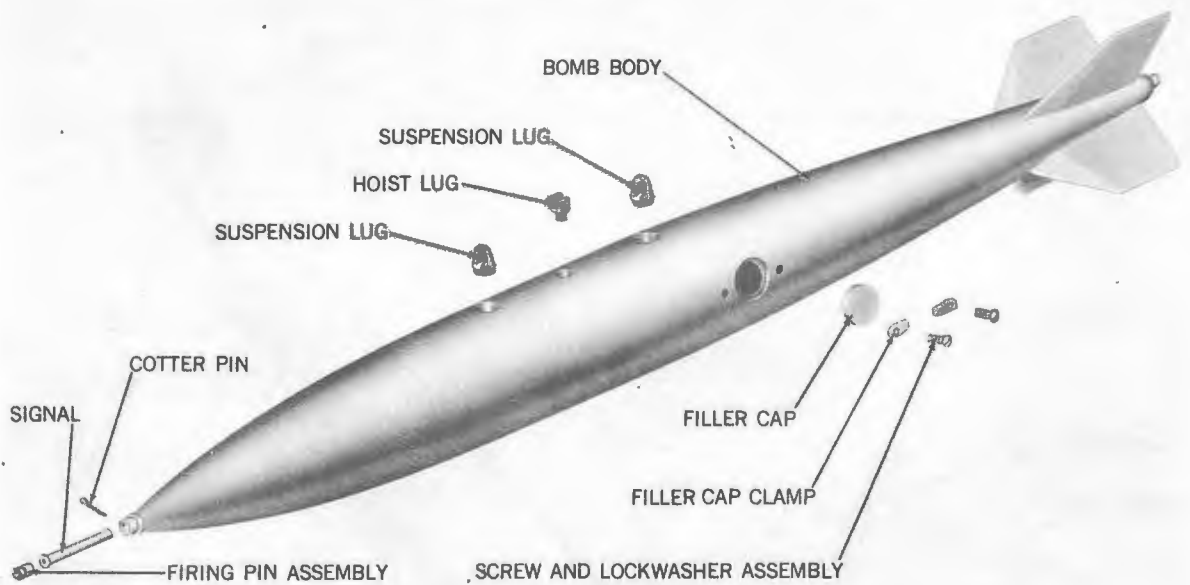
500-lb Practice Bomb Mk 87 Mod 0, Exploded View.
